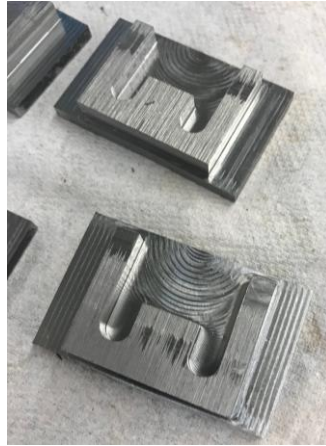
STATOR IN BETWEEN MACHINING OPERATIONS
